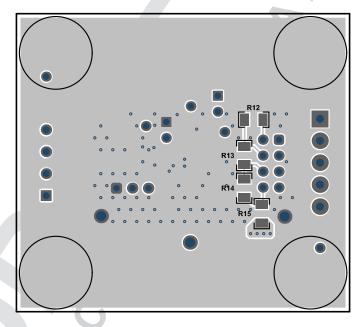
BQ2969 Two-Layer Board Layout - Bottom Layer
